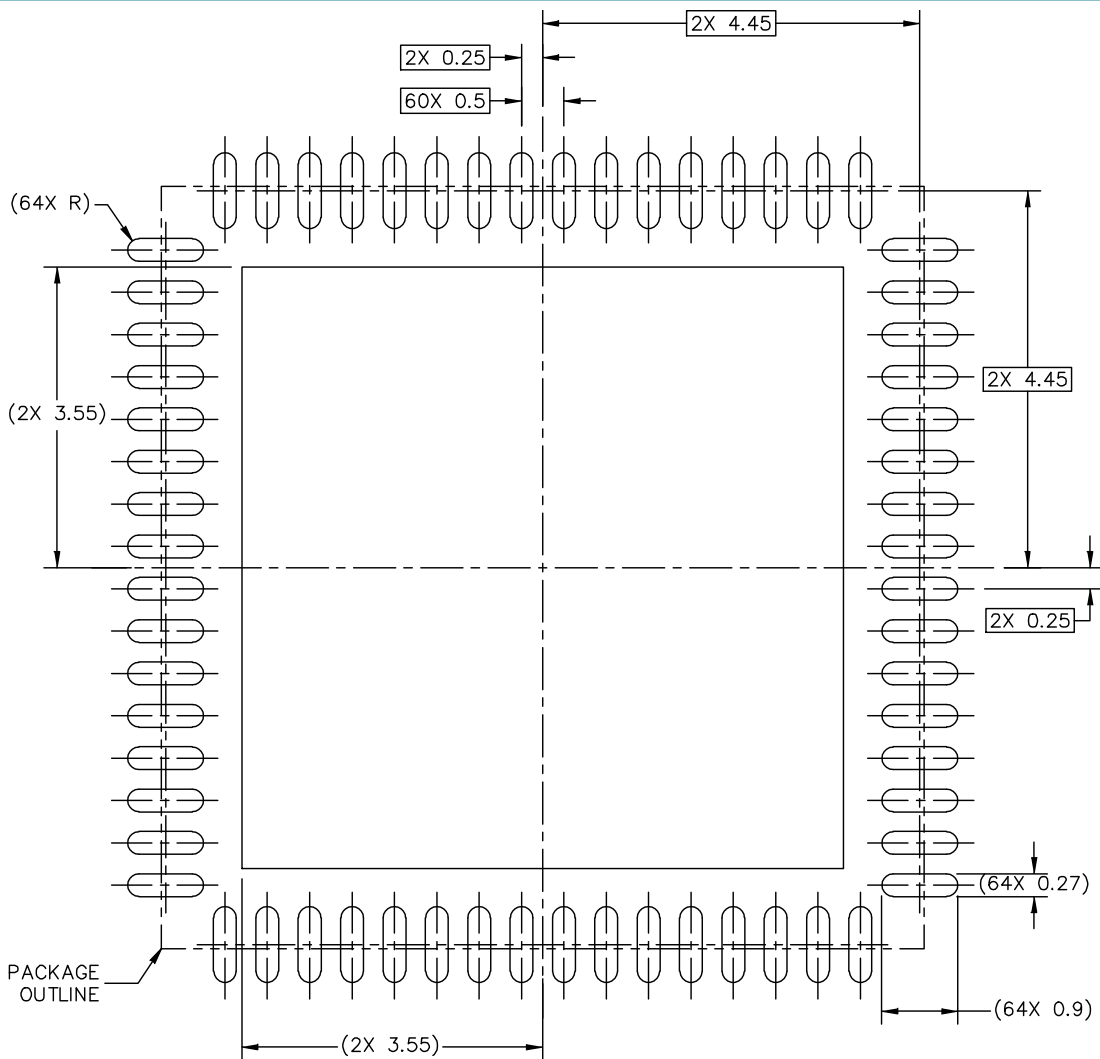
Reflow soldering footprint part1 for HVQFN64 (SOT804-3(D))
